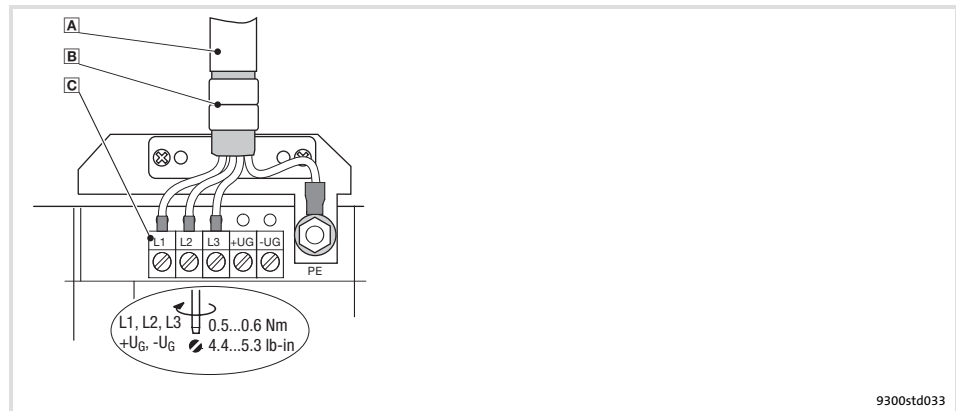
Mains connection, DC supply for drive controllers 0.37 ... 11 kW
